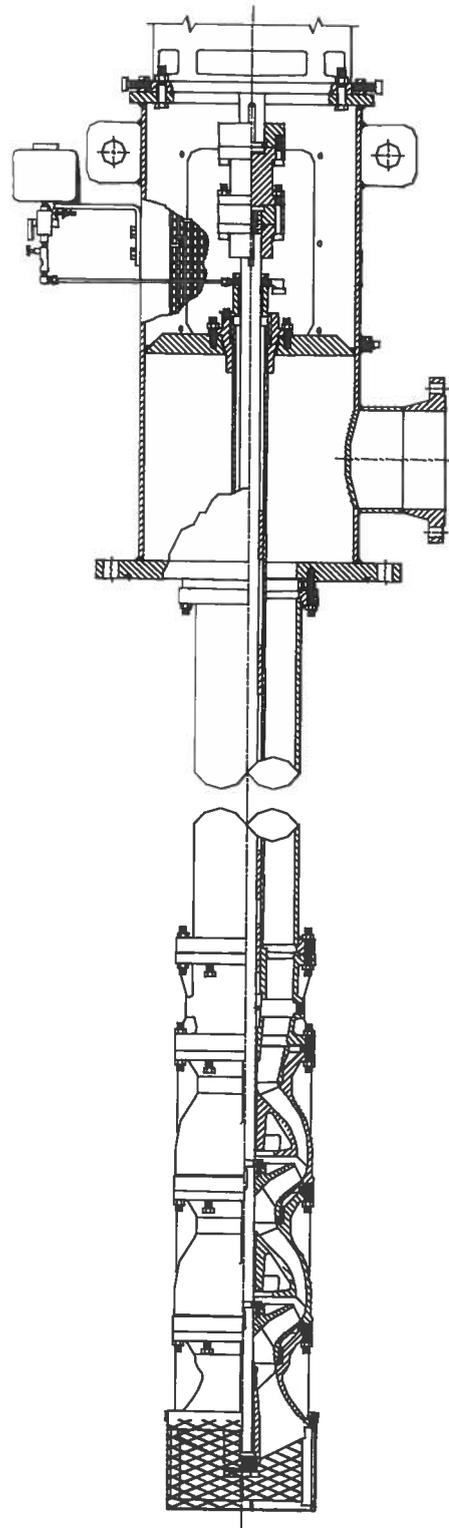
Enclosed line-shaft, oil-lubricated, vertical turbine pump
